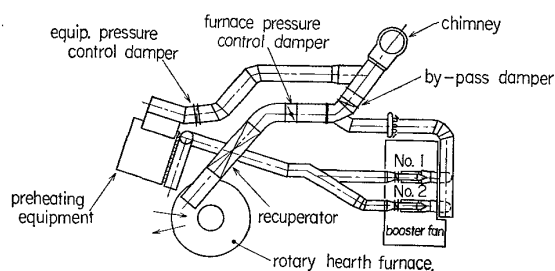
Layout of rotary hearth furnace with waste gas jet preheating equipment separately.
